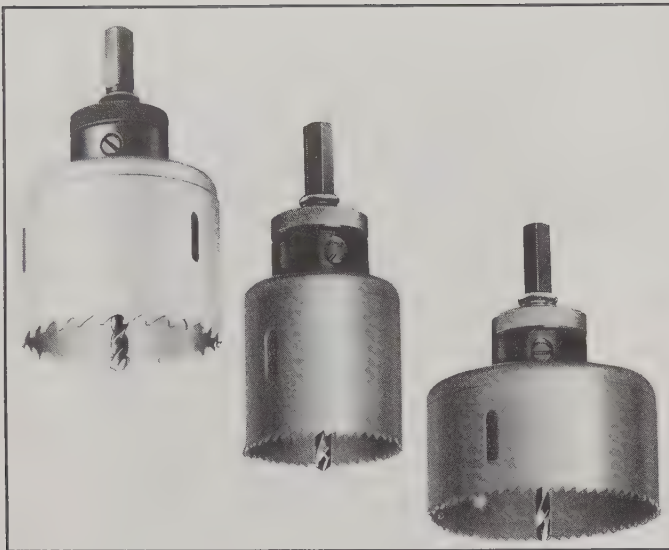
Hole saws are attached to an arbor that includes a twist drill bit that bores a pilot hole. The saw at left is a carbide-tipped deep-cutting type. A deep-cutting saw without carbide tips is at center, and a standard-depth saw at right. (Milwaukee Electric Tool Corp.)
